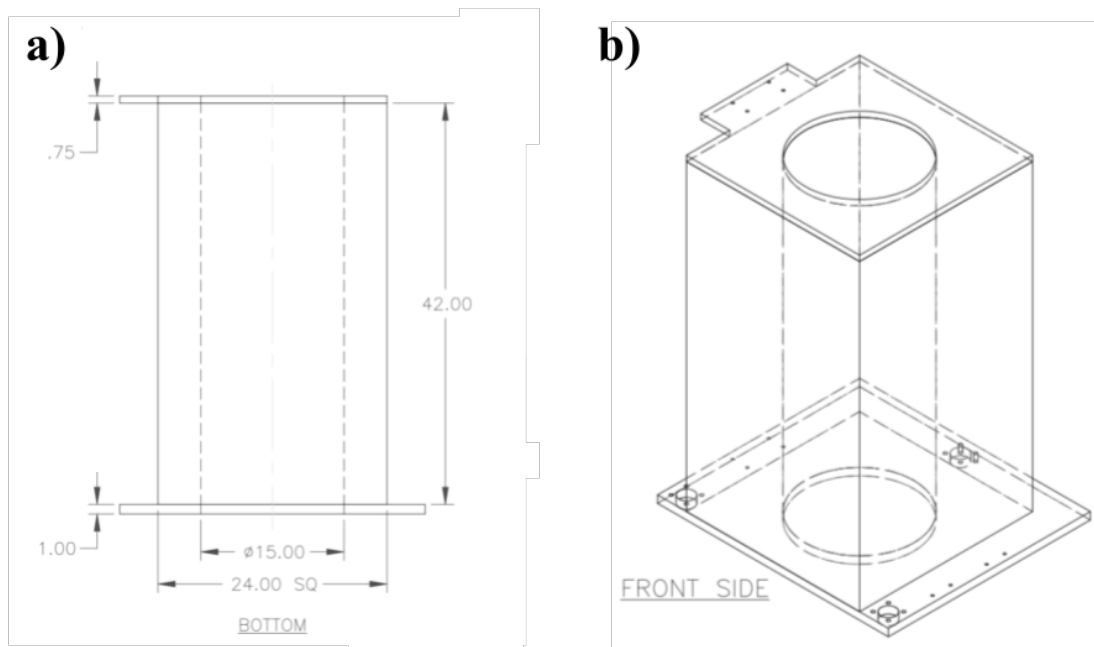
Solenoid drawing: a) dimensions; b) three-dimensional view. Figure modified from Joe Neal’s engineering drawing.
